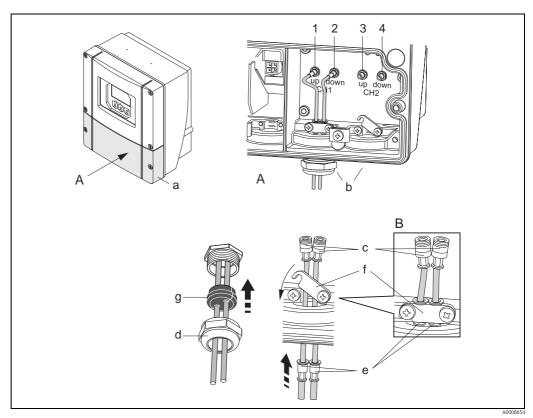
Connecting the connecting cable for sensor/transmitter (with cable gland for two connecting cables per cable entry)
